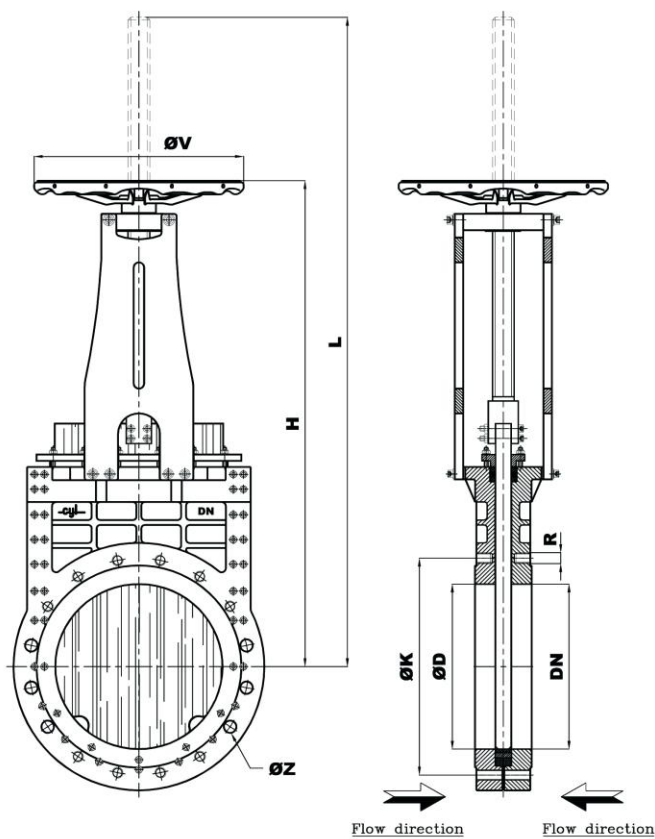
KGV XD-HP series rising stem with handwheel & gearbox
